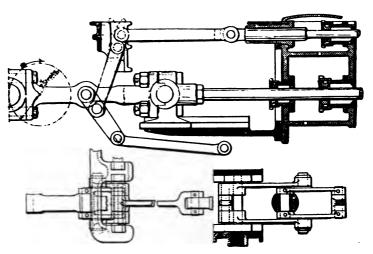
The Lancashire heavy-freight steam vehicles. Views of valve gear.
